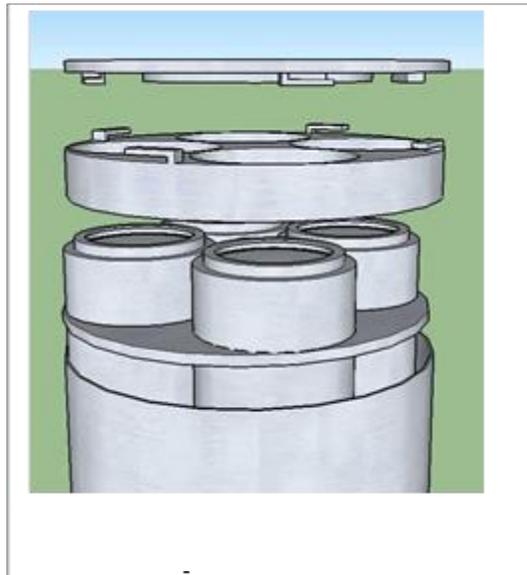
Assembly View of STAD Overpack Can with Four Small STAD Canisters.
